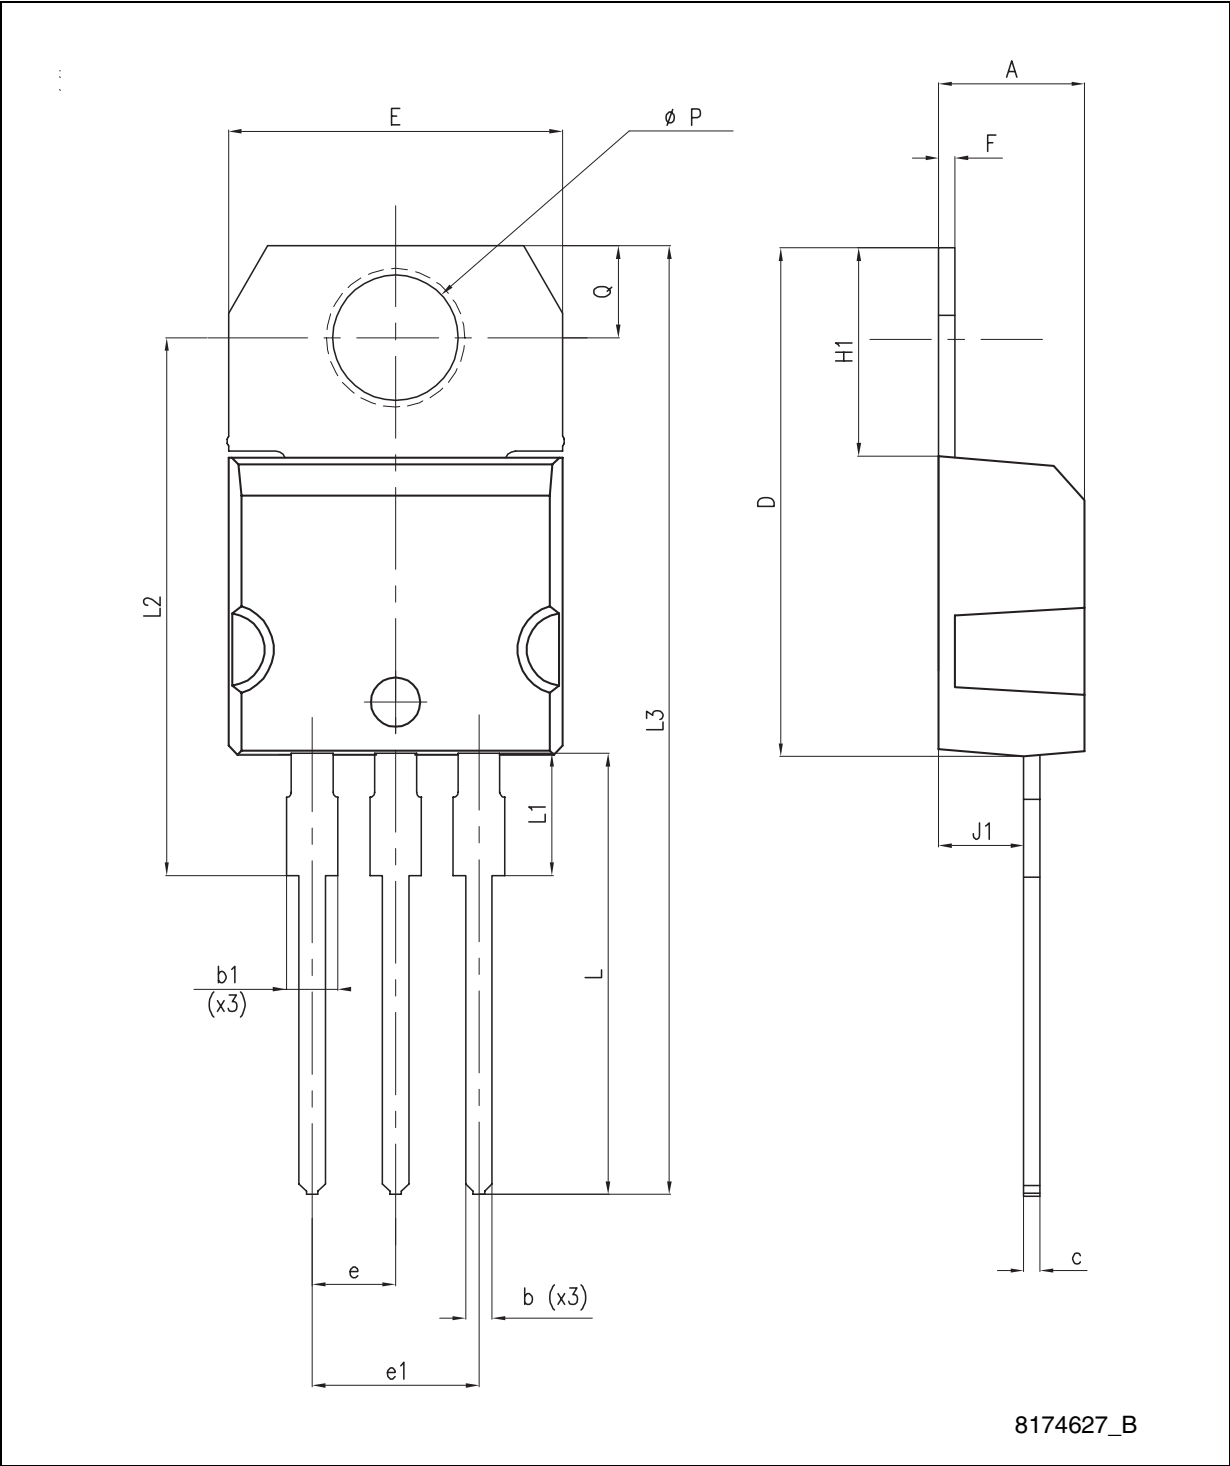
Drawing dimension tube for TO-220 Dual Gauge (mm.)
